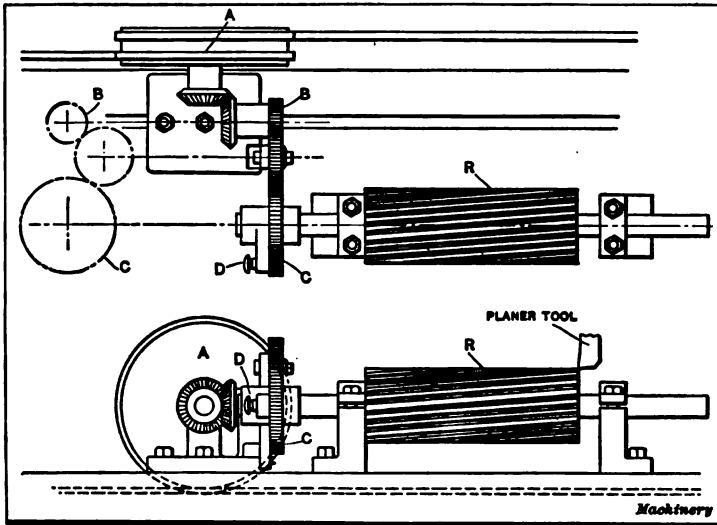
Spiral Planing Attachment Operated by Chain Drum and Gearing
